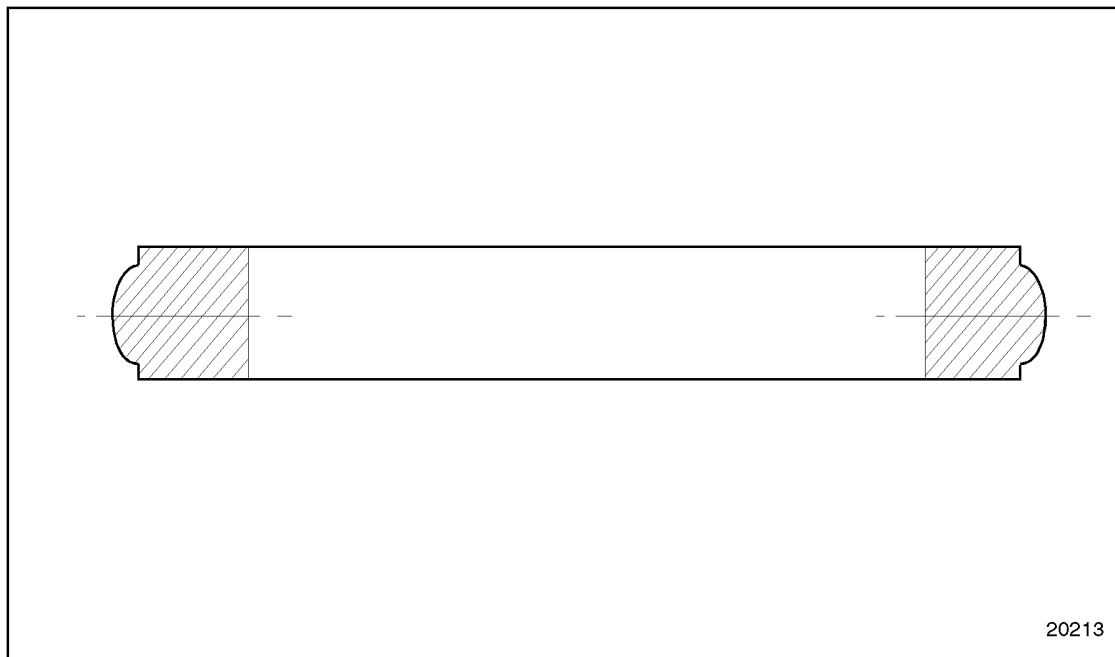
Cylinder Liner Seal Ring Cross-Section
